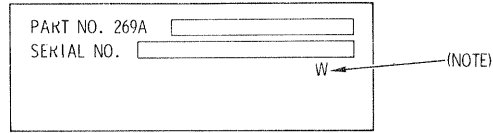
Inspection and replacement - ring gear, ring gear carrier, attach hardware
